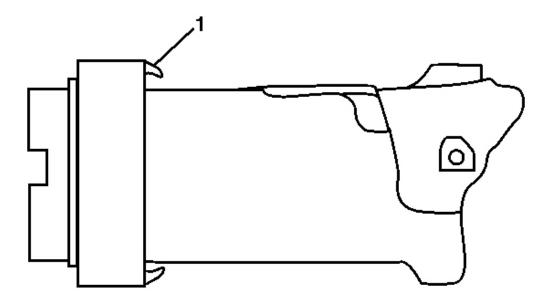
Inspecting Bearing & Adapter Assembly Tab For Breakage Courtesy of GENERAL MOTORS CORP.
